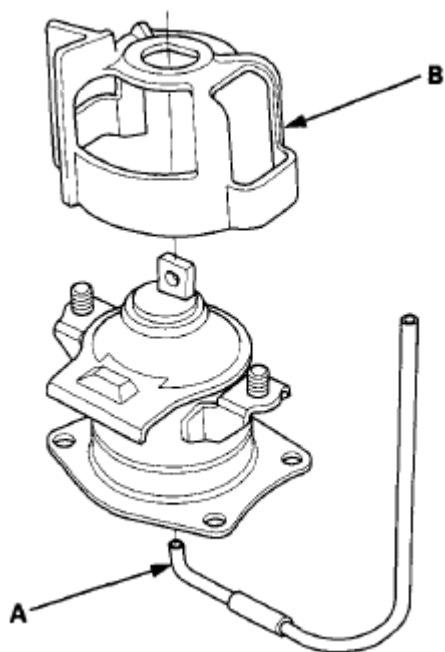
Removing Engine Mount Insulator From Engine Mount
